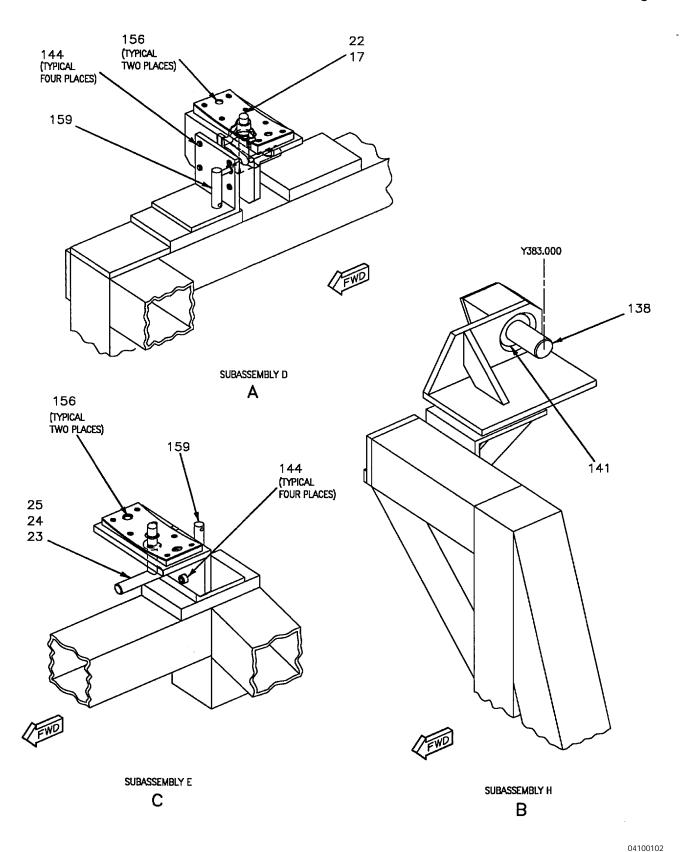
Engine Air Inlet Installation Alignment Fixture; RE474322020-1/-2 (Sheet 2)
